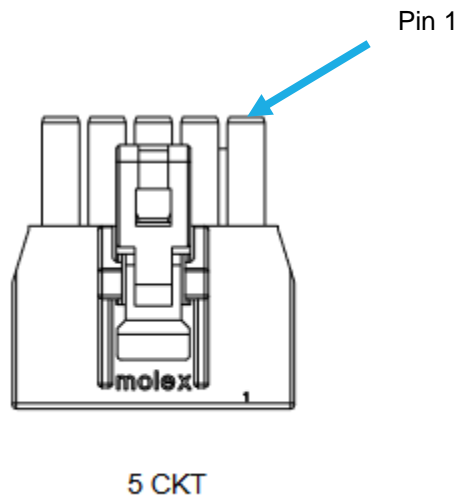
MATING CONNECTOR - PIN 1 IS RIGHT HAND SIDE (TOP-DOWN VIEW)
